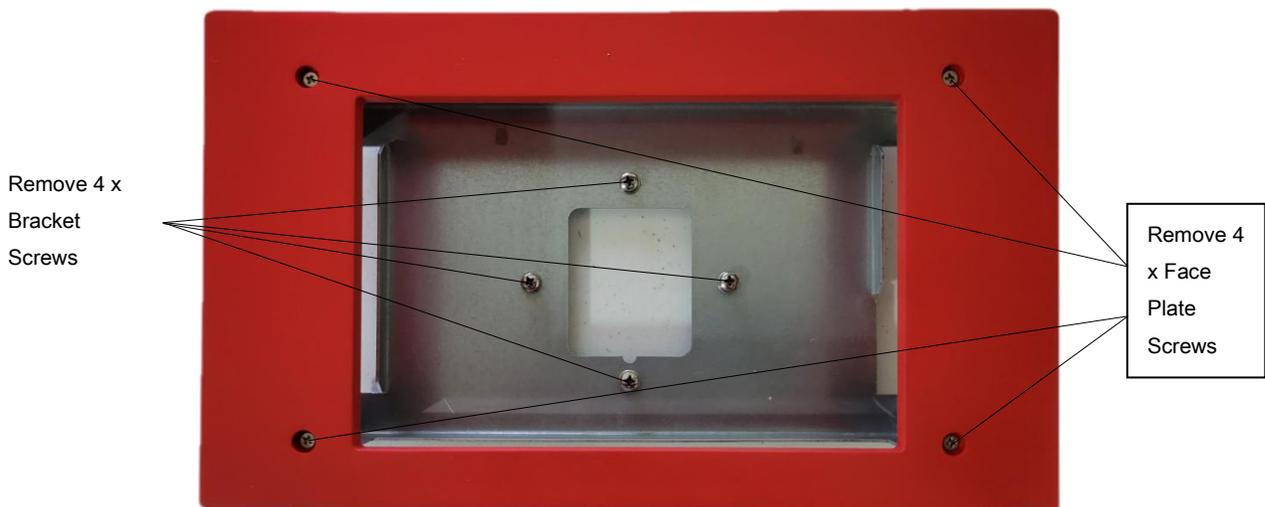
APV3-DAS - Flush Mount Kit Face Plate and Bracket Screw Removal
